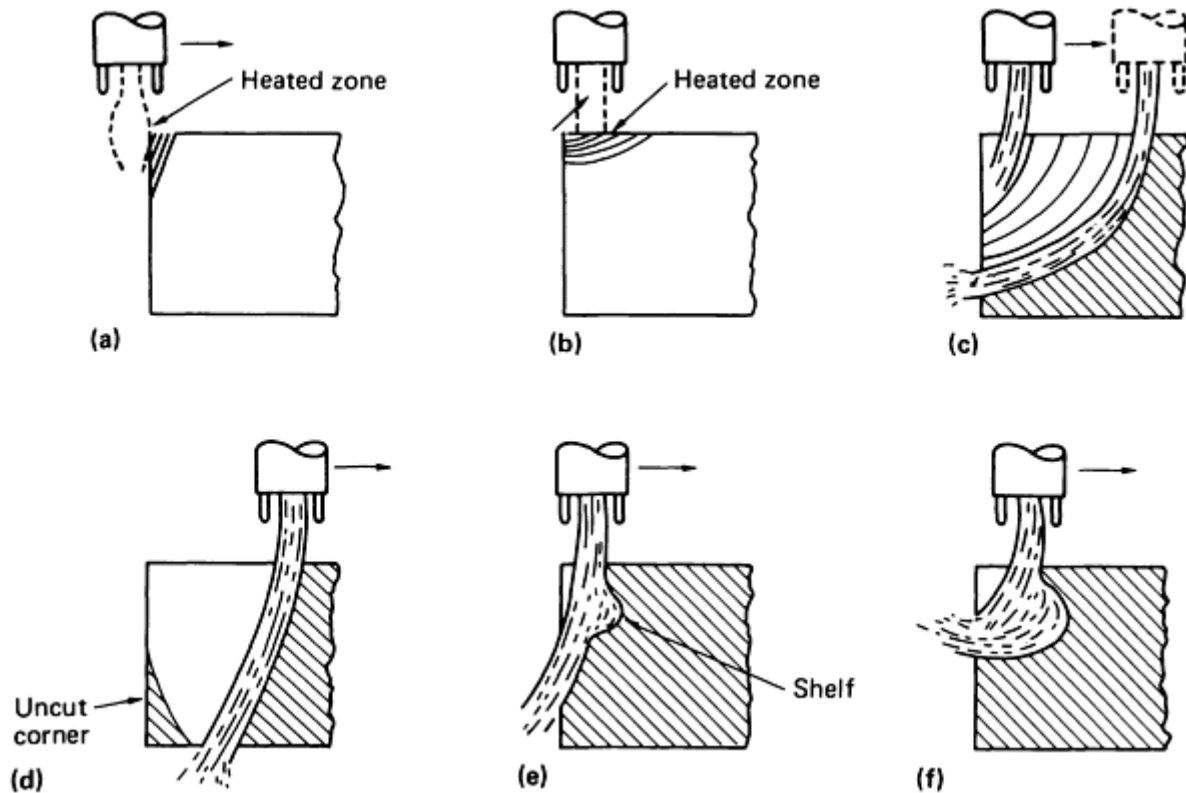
PROPER AND IMPROPER TECHNIQUES FOR HEAVY CUTTING. (A) PROPER TORCH POSITION; PREHEAT IS PRIMARILY ON STARTING FACE. (B) IMPROPER START; OXYGEN STREAM IS TOO FAR ONTO WORK, WHICH RESULTS IN ACTION OF CUT AS SHOWN IN (C) AND IN UNCUT CORNER AS SHOWN IN (D). (E) EXCESSIVE OXYGEN PRESSURE OR ACTION OF CUT AT TOO LOW A SPEED. (F) INSUFFICIENT OXYGEN PRESSURE OR ACTION OF CUT AT TOO HIGH A SPEED
